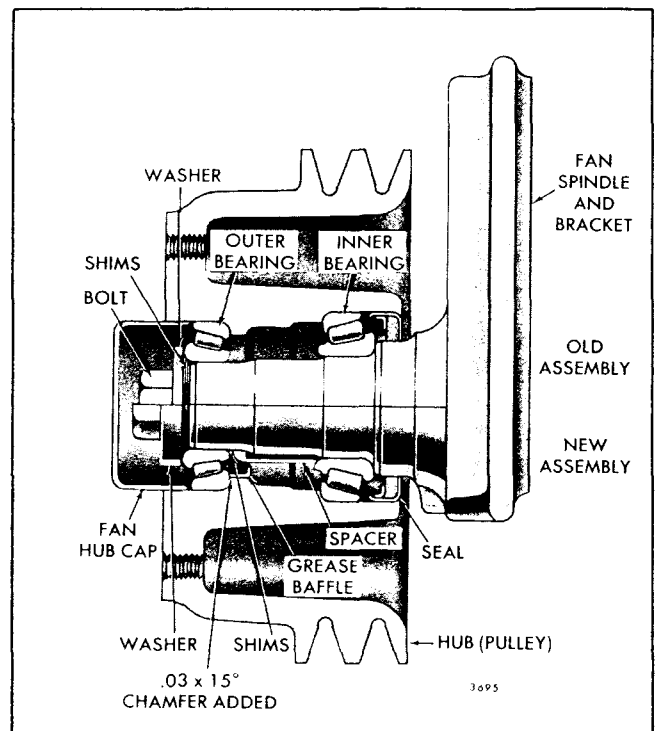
Spindle Type Fan Hub Assembly (6V and 8V Engine)
